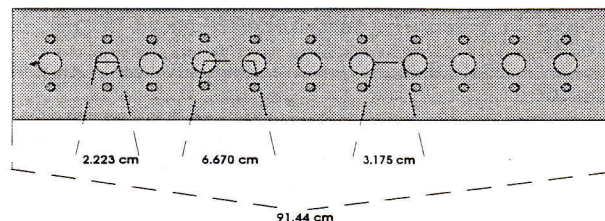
Shaft hole spacing and bearing fasteners distance employed.
